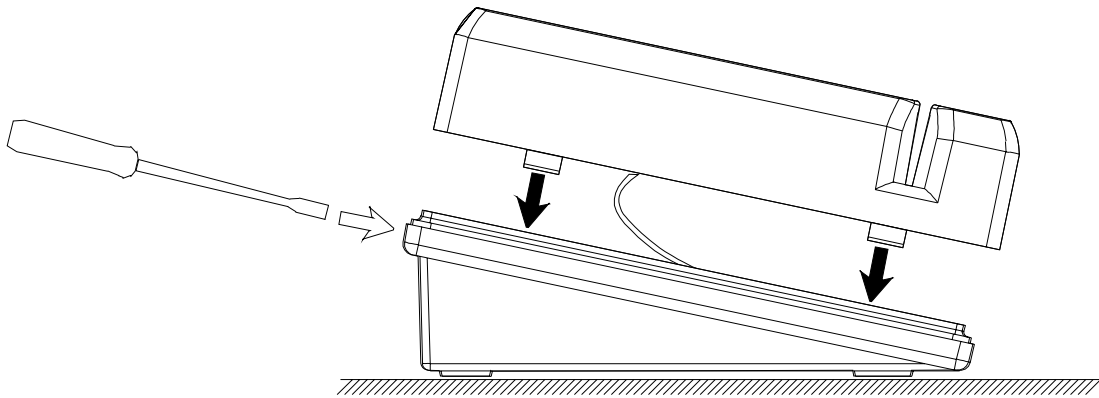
Closing the Terminal (Turnstile-Mounted Assembly)
